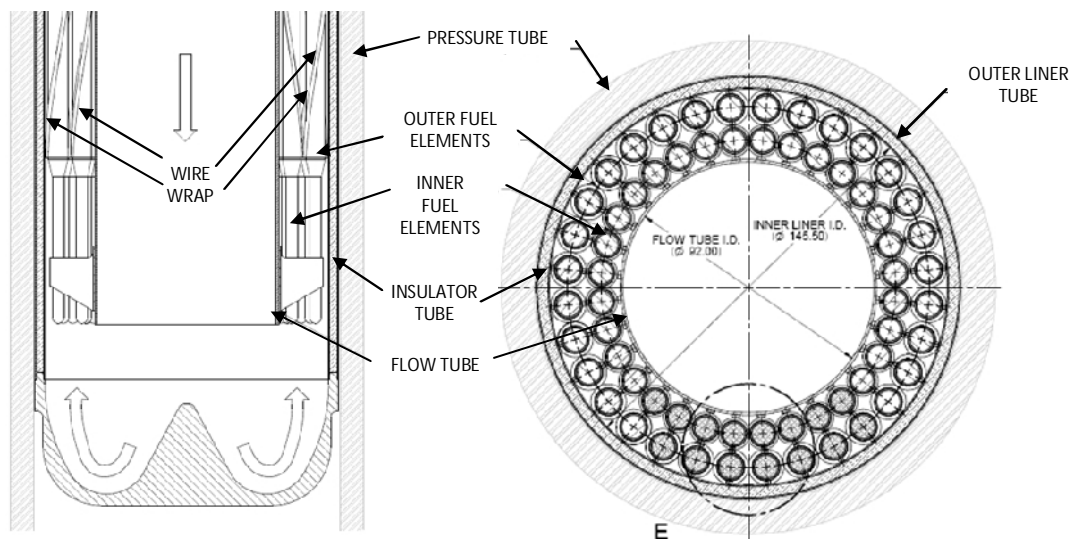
Canadian SCWR fuel channel horizontal cross-section (left) and vertical cross section (right), showing central flow tube, fuel elements, wire wrap, inner liner tube, insulator tube, outer liner tube and pressure tube.
